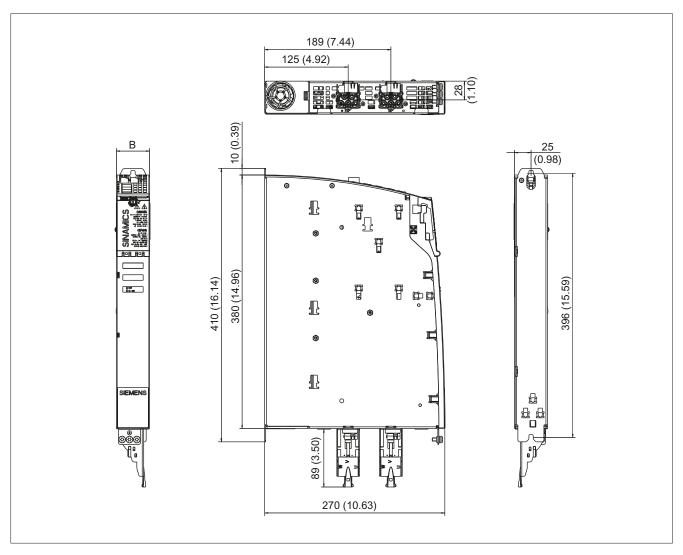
Dimension drawing of Motor Module Booksize with internal air cooling 3 A to 18 A and 2 x 3 A to 2 x 9 A, all dimensions in mm and (inches); example: Double Motor Module 2 x 5 A
